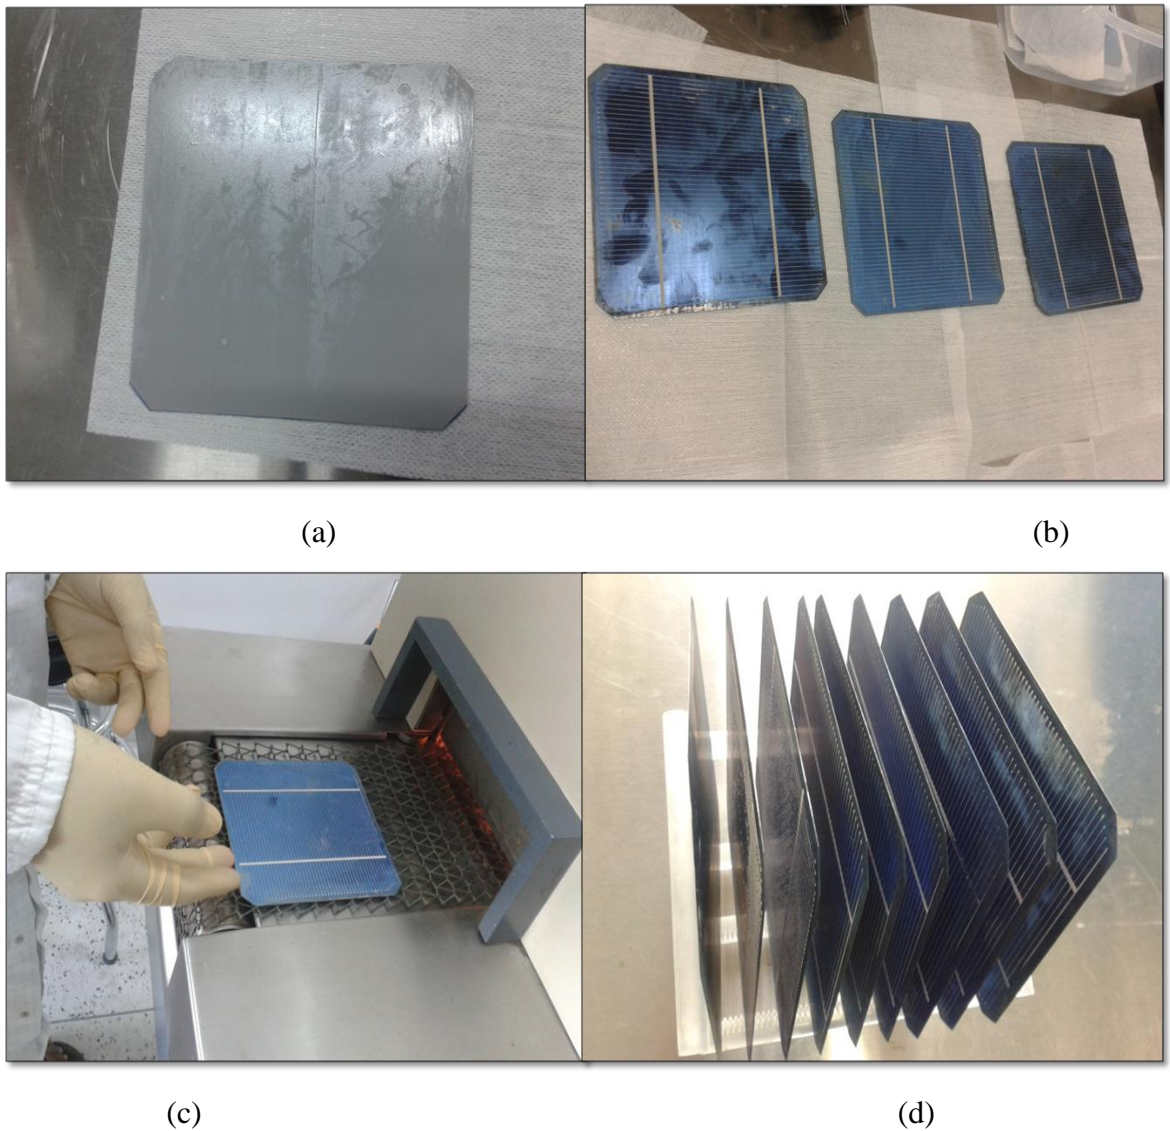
(a) Screen printed rear surface by Al paste (b) Screen printed front surface by Ag paste (c) Co-firing process by belt furnace (d) Fabricated mono-silicon solar cell
